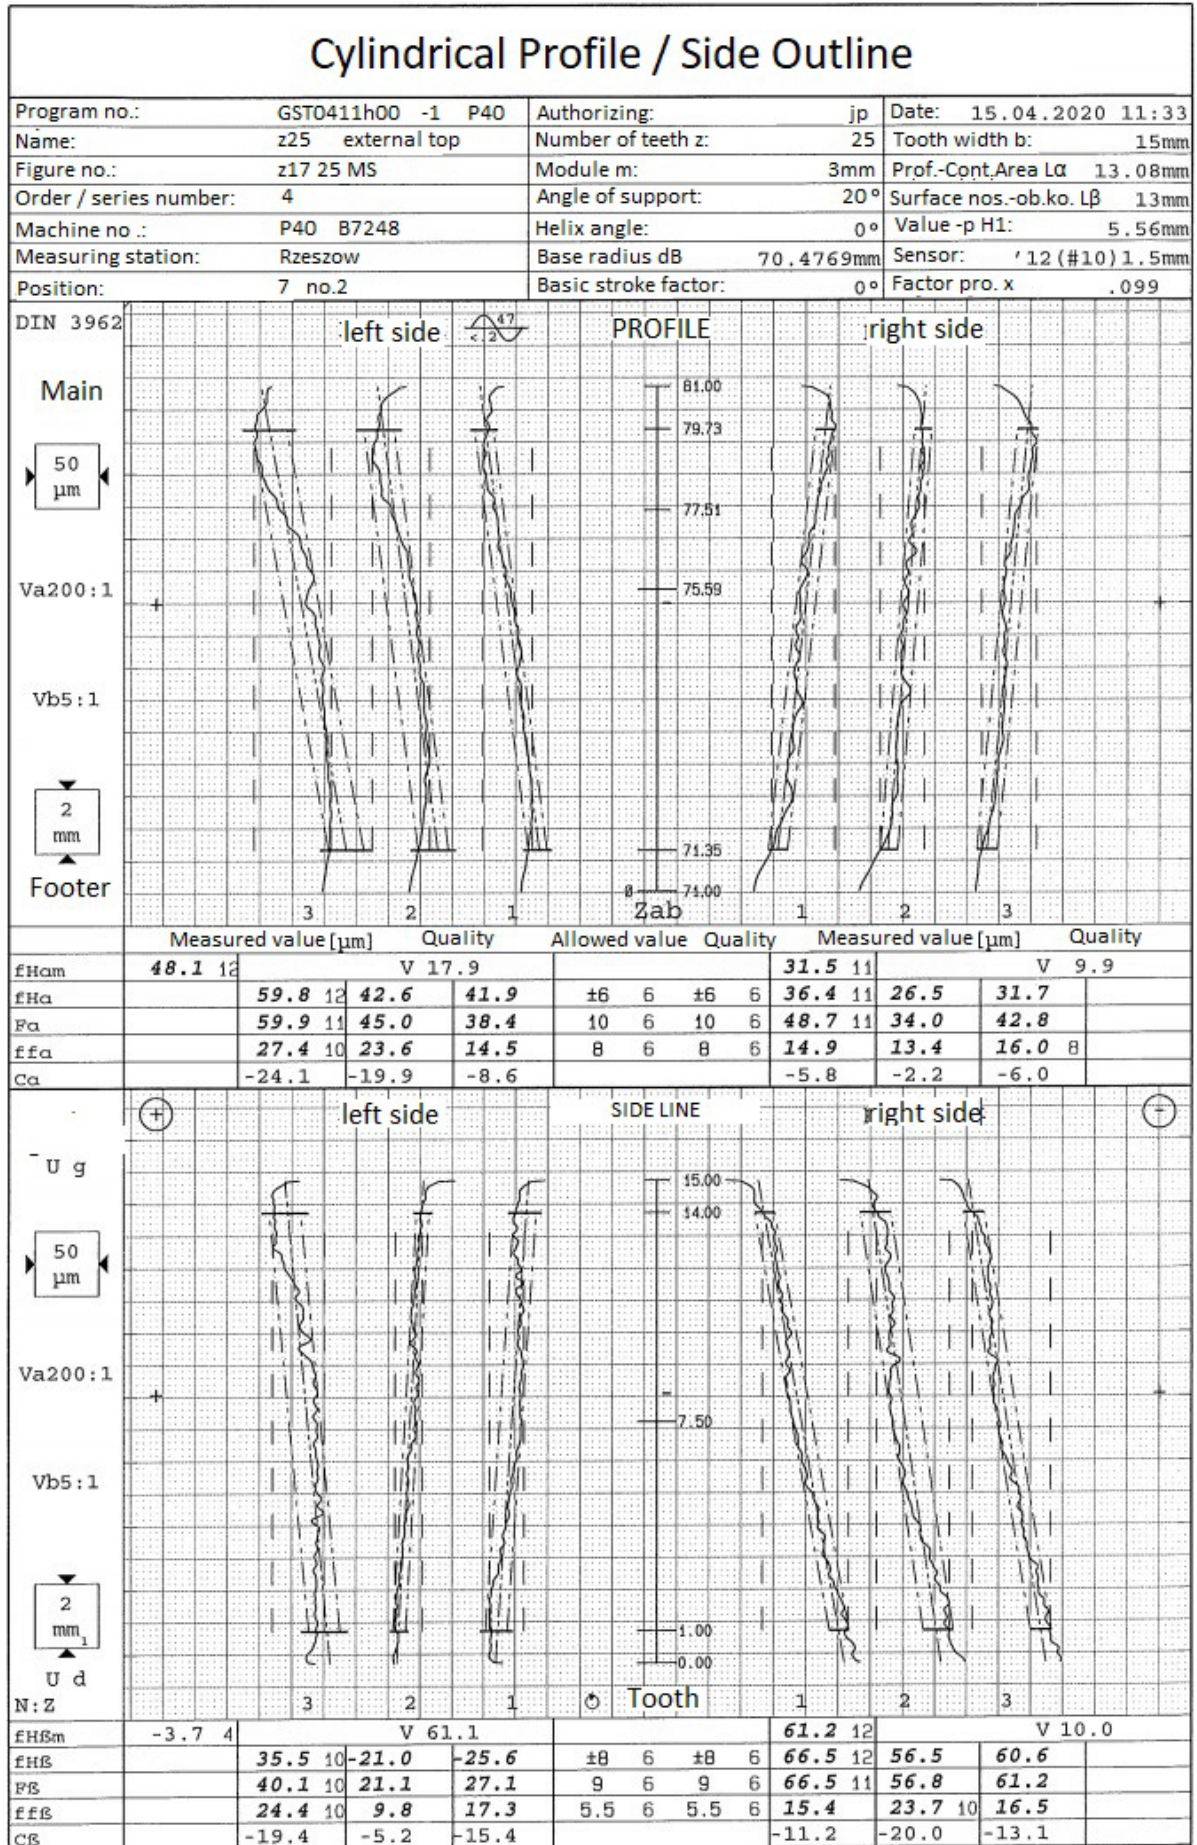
Profile and tooth line of a large gear wheel made of P2 material (KZ25)
